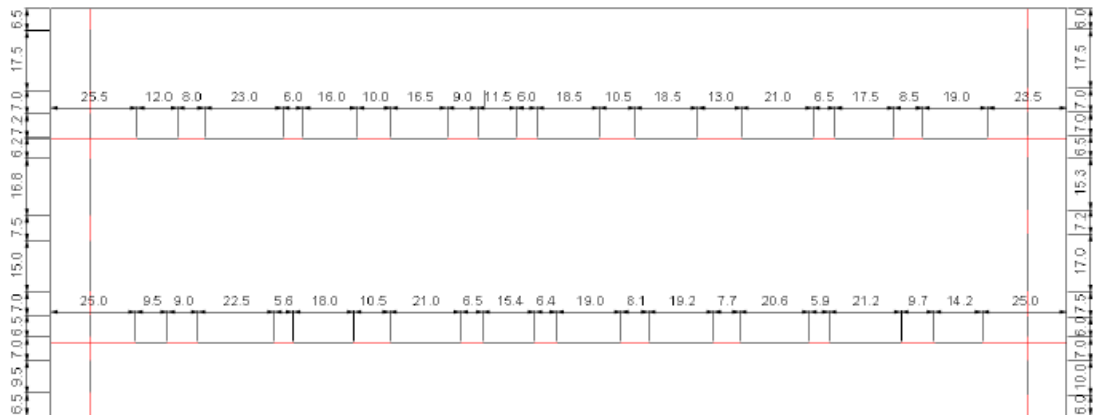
Intermittent welding between stiffeners, girders and plate
